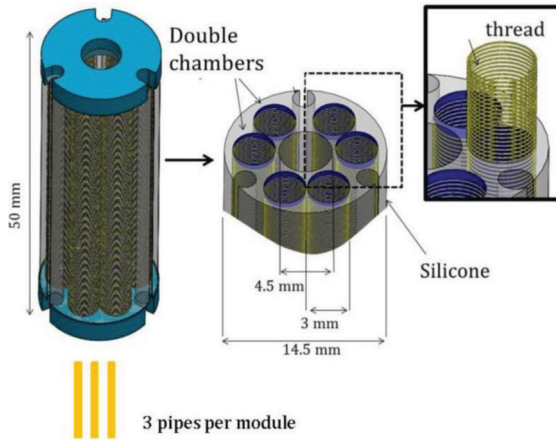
Single-module design with relevant quotes. The section view in the middle shows the inner arrangement of the chambers. The inset shows an exploded view of the thread used for avoiding the lateral chamber expansion.
